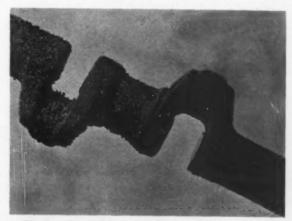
Crankshaft casting showing metal penetration on one end.
